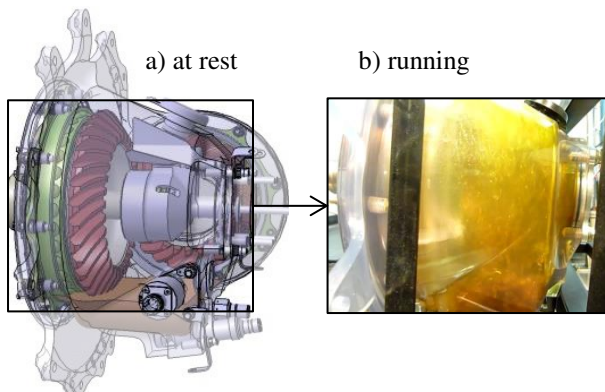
Oil flow inside the oil sump lubricated gearbox
